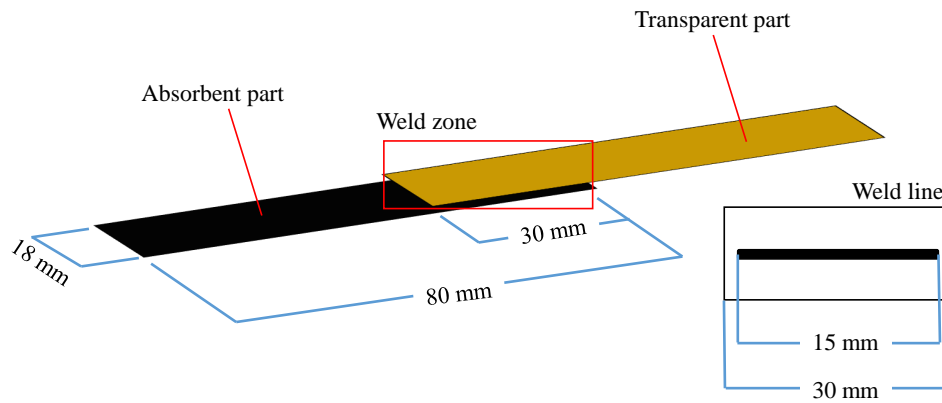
Lap-joint setup for laser transmission welding
